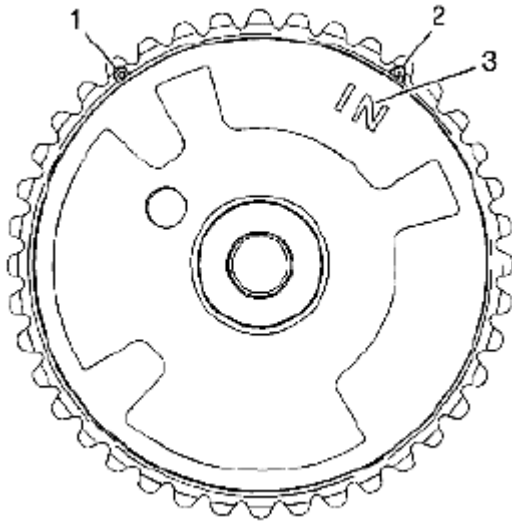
Identifying Outer Ring Of Camshaft Position Actuator For Triangle Marking
